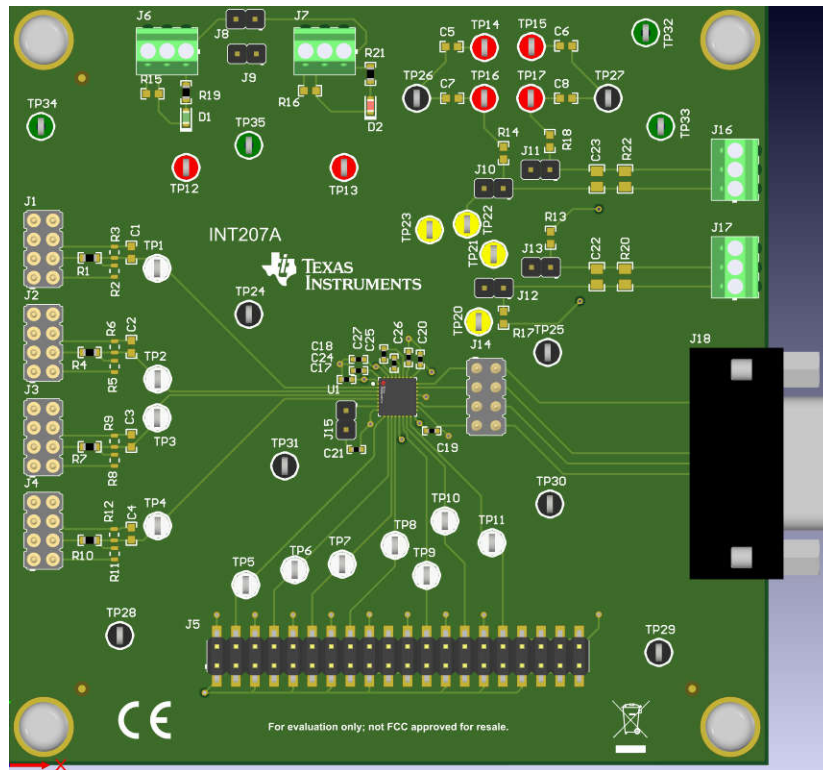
THVD4421EVM - Top Layer 3D PCB Layout
